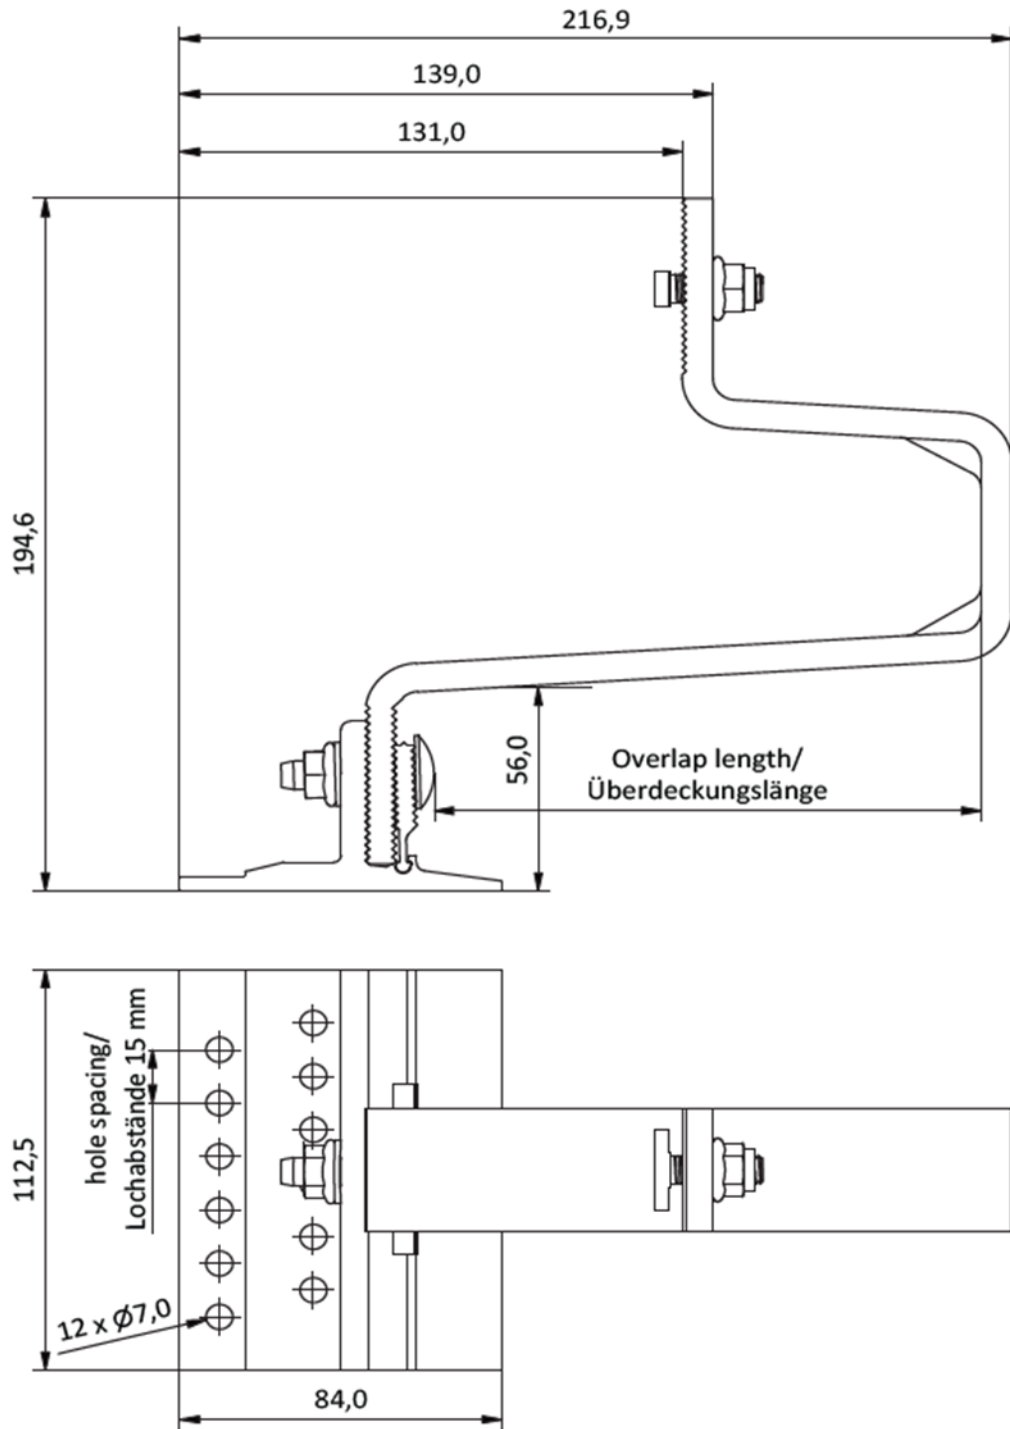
Dimensions in mm of "DH Hybrid 112-7-56 XL 8mm"
